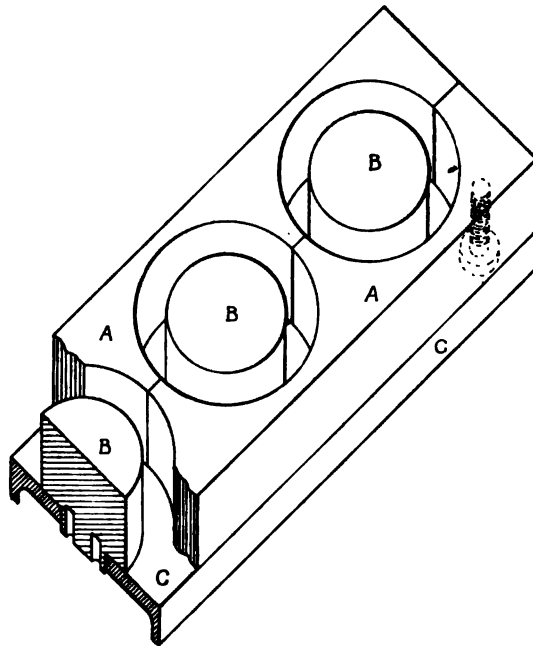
Sketch showing plan, half section and half elevation of mould for making cement rings used to determine the tensile strength of cements.
